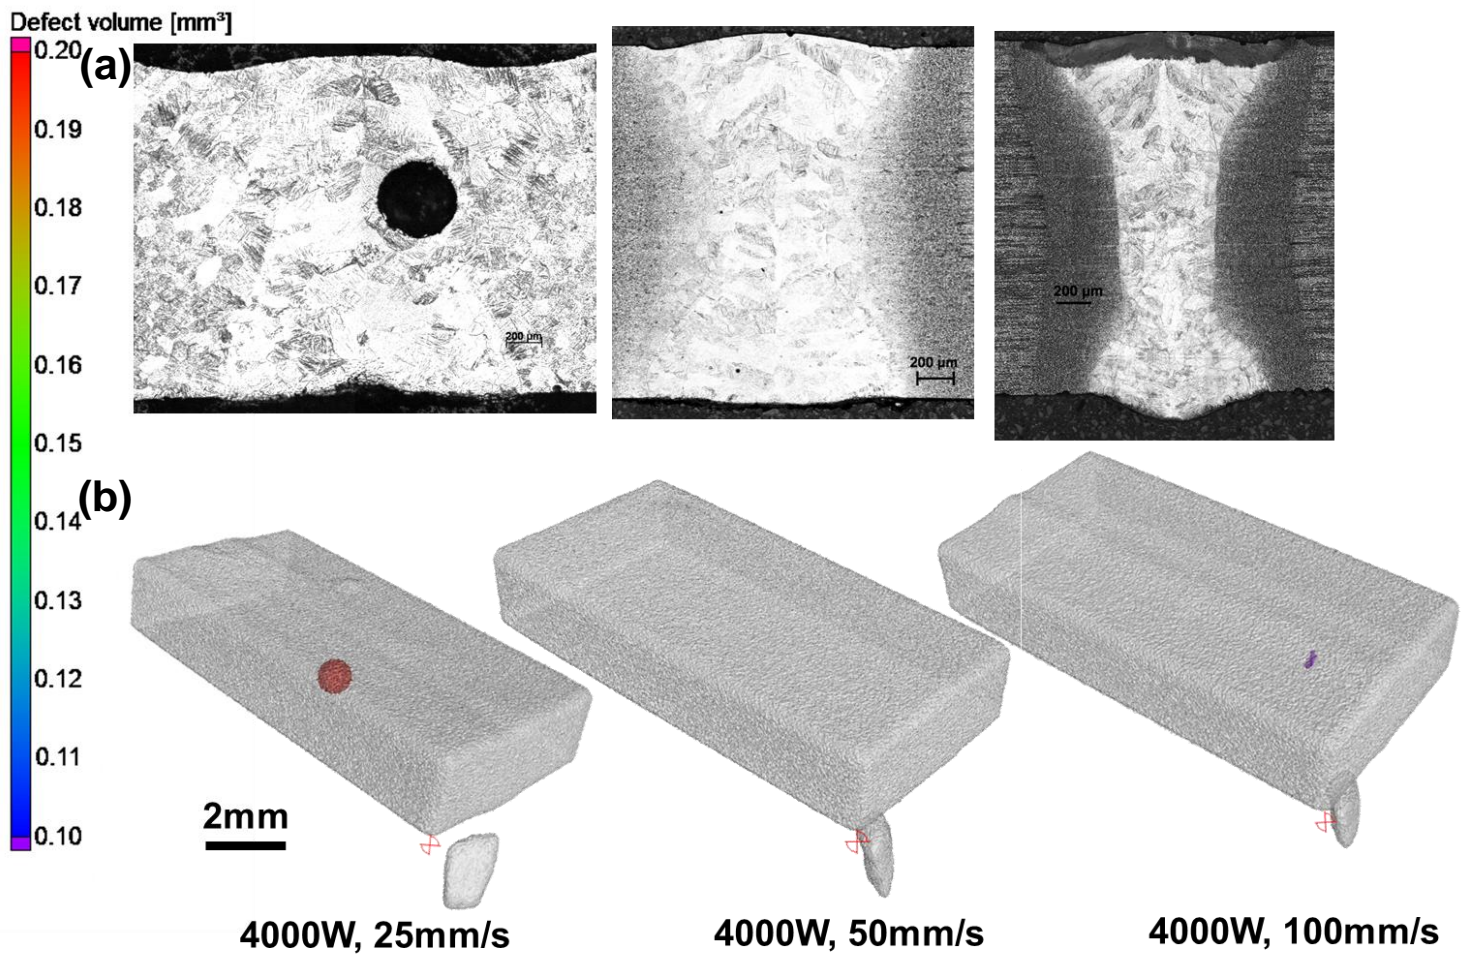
(a) optical micrographs and (b) reconstructed 3D X-ray tomography of the 2mm thick weld using welding conditions of a constant 4000W laser power and three welding speeds of 25mm/s, 50mm/s and 100mm/s.
